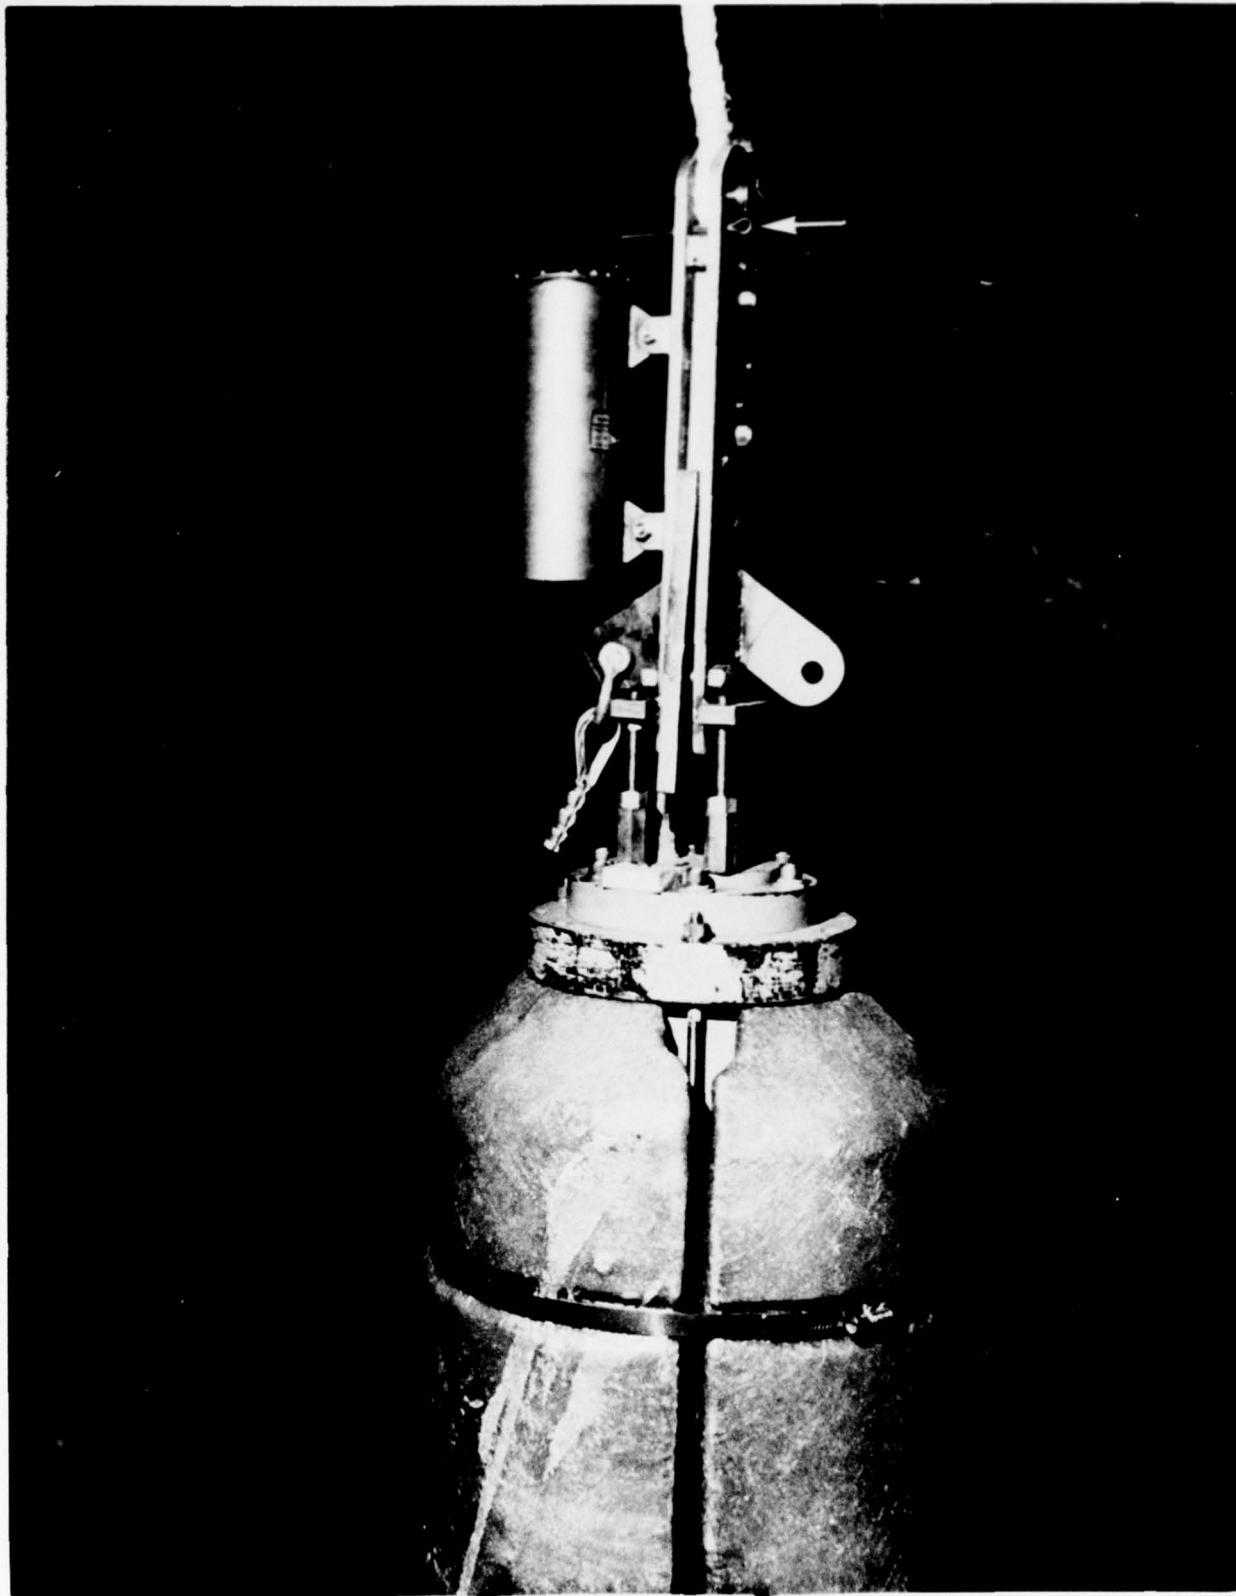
Trip Mechanism Safety Lock and Finger Assy. in Cocked Position
